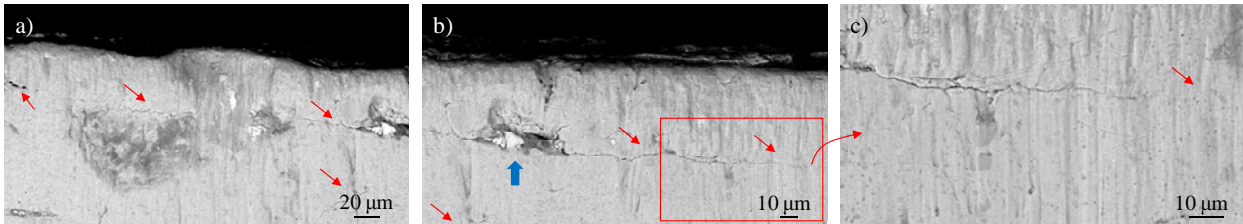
Fatigue cracks (red arrows) observed in the flank face of a 917H punch. These cracks could have been nucleated from surface defects (shown by the blue arrow)
